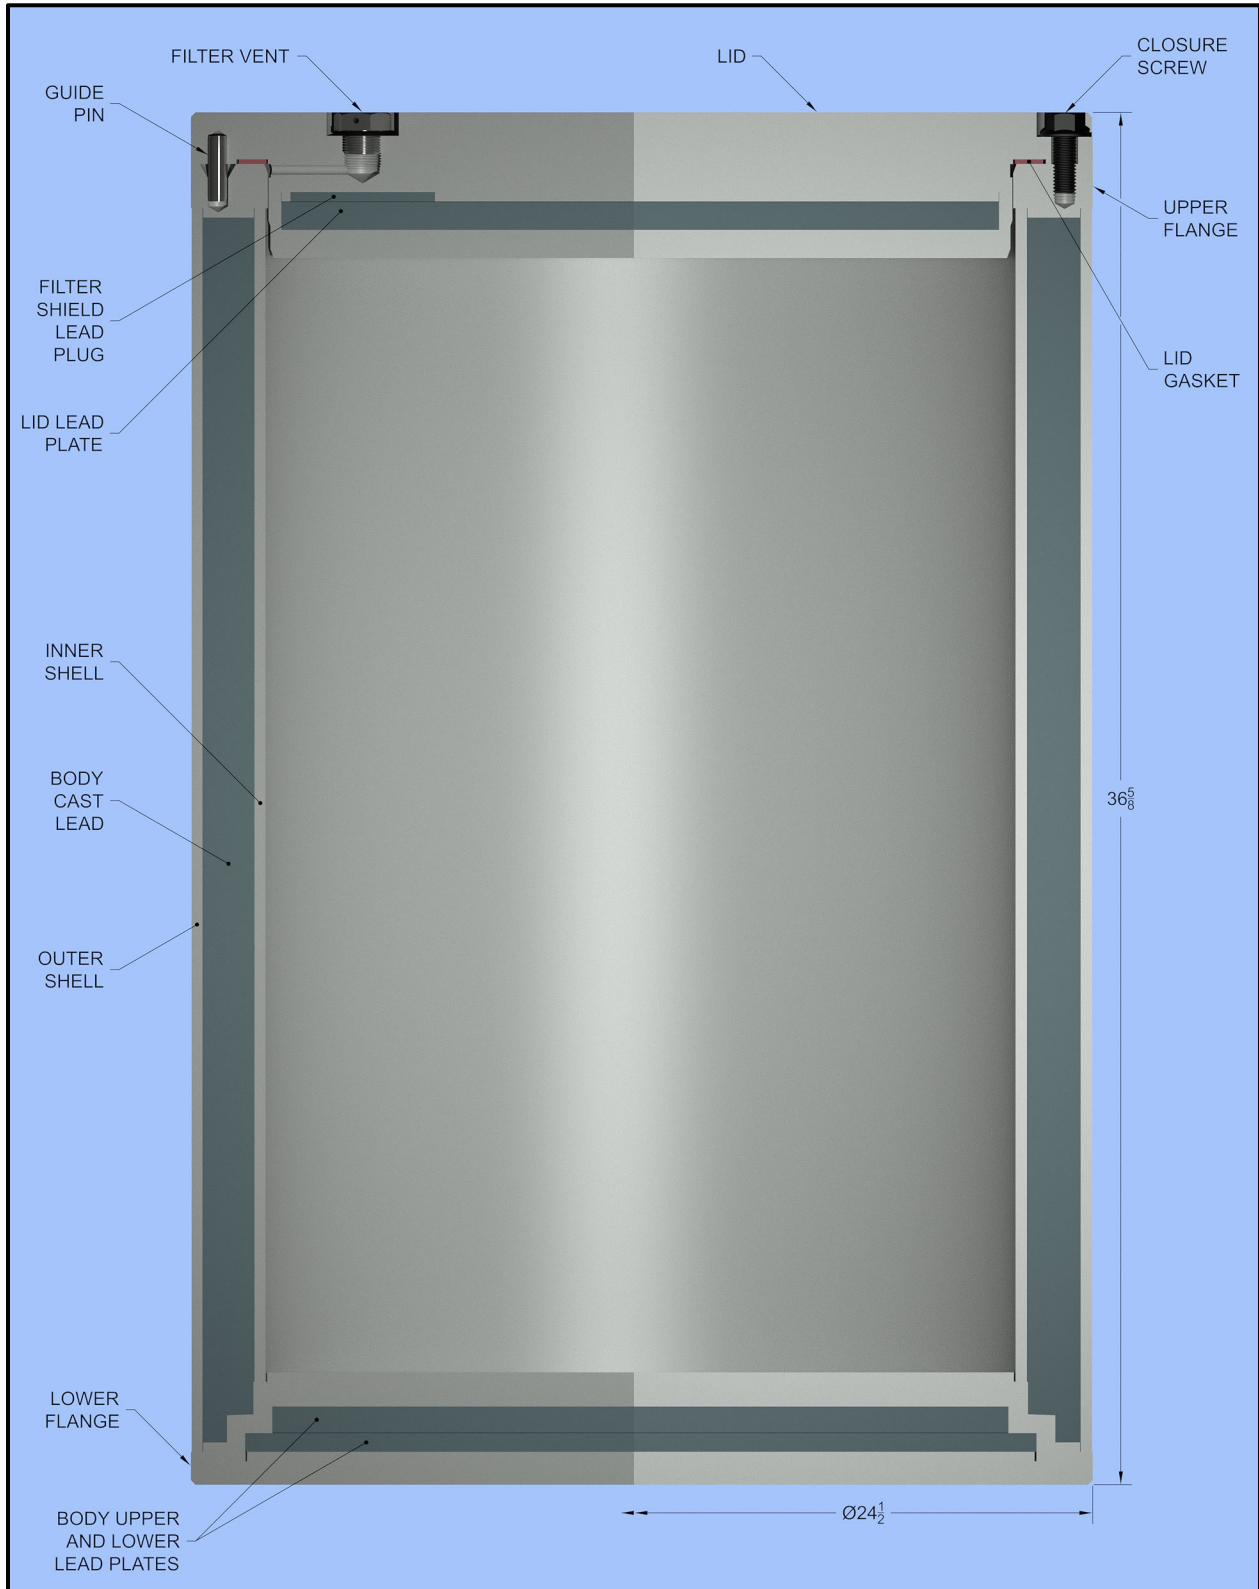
SC-30G2 Shielded Container (shown without Payload Drum)
